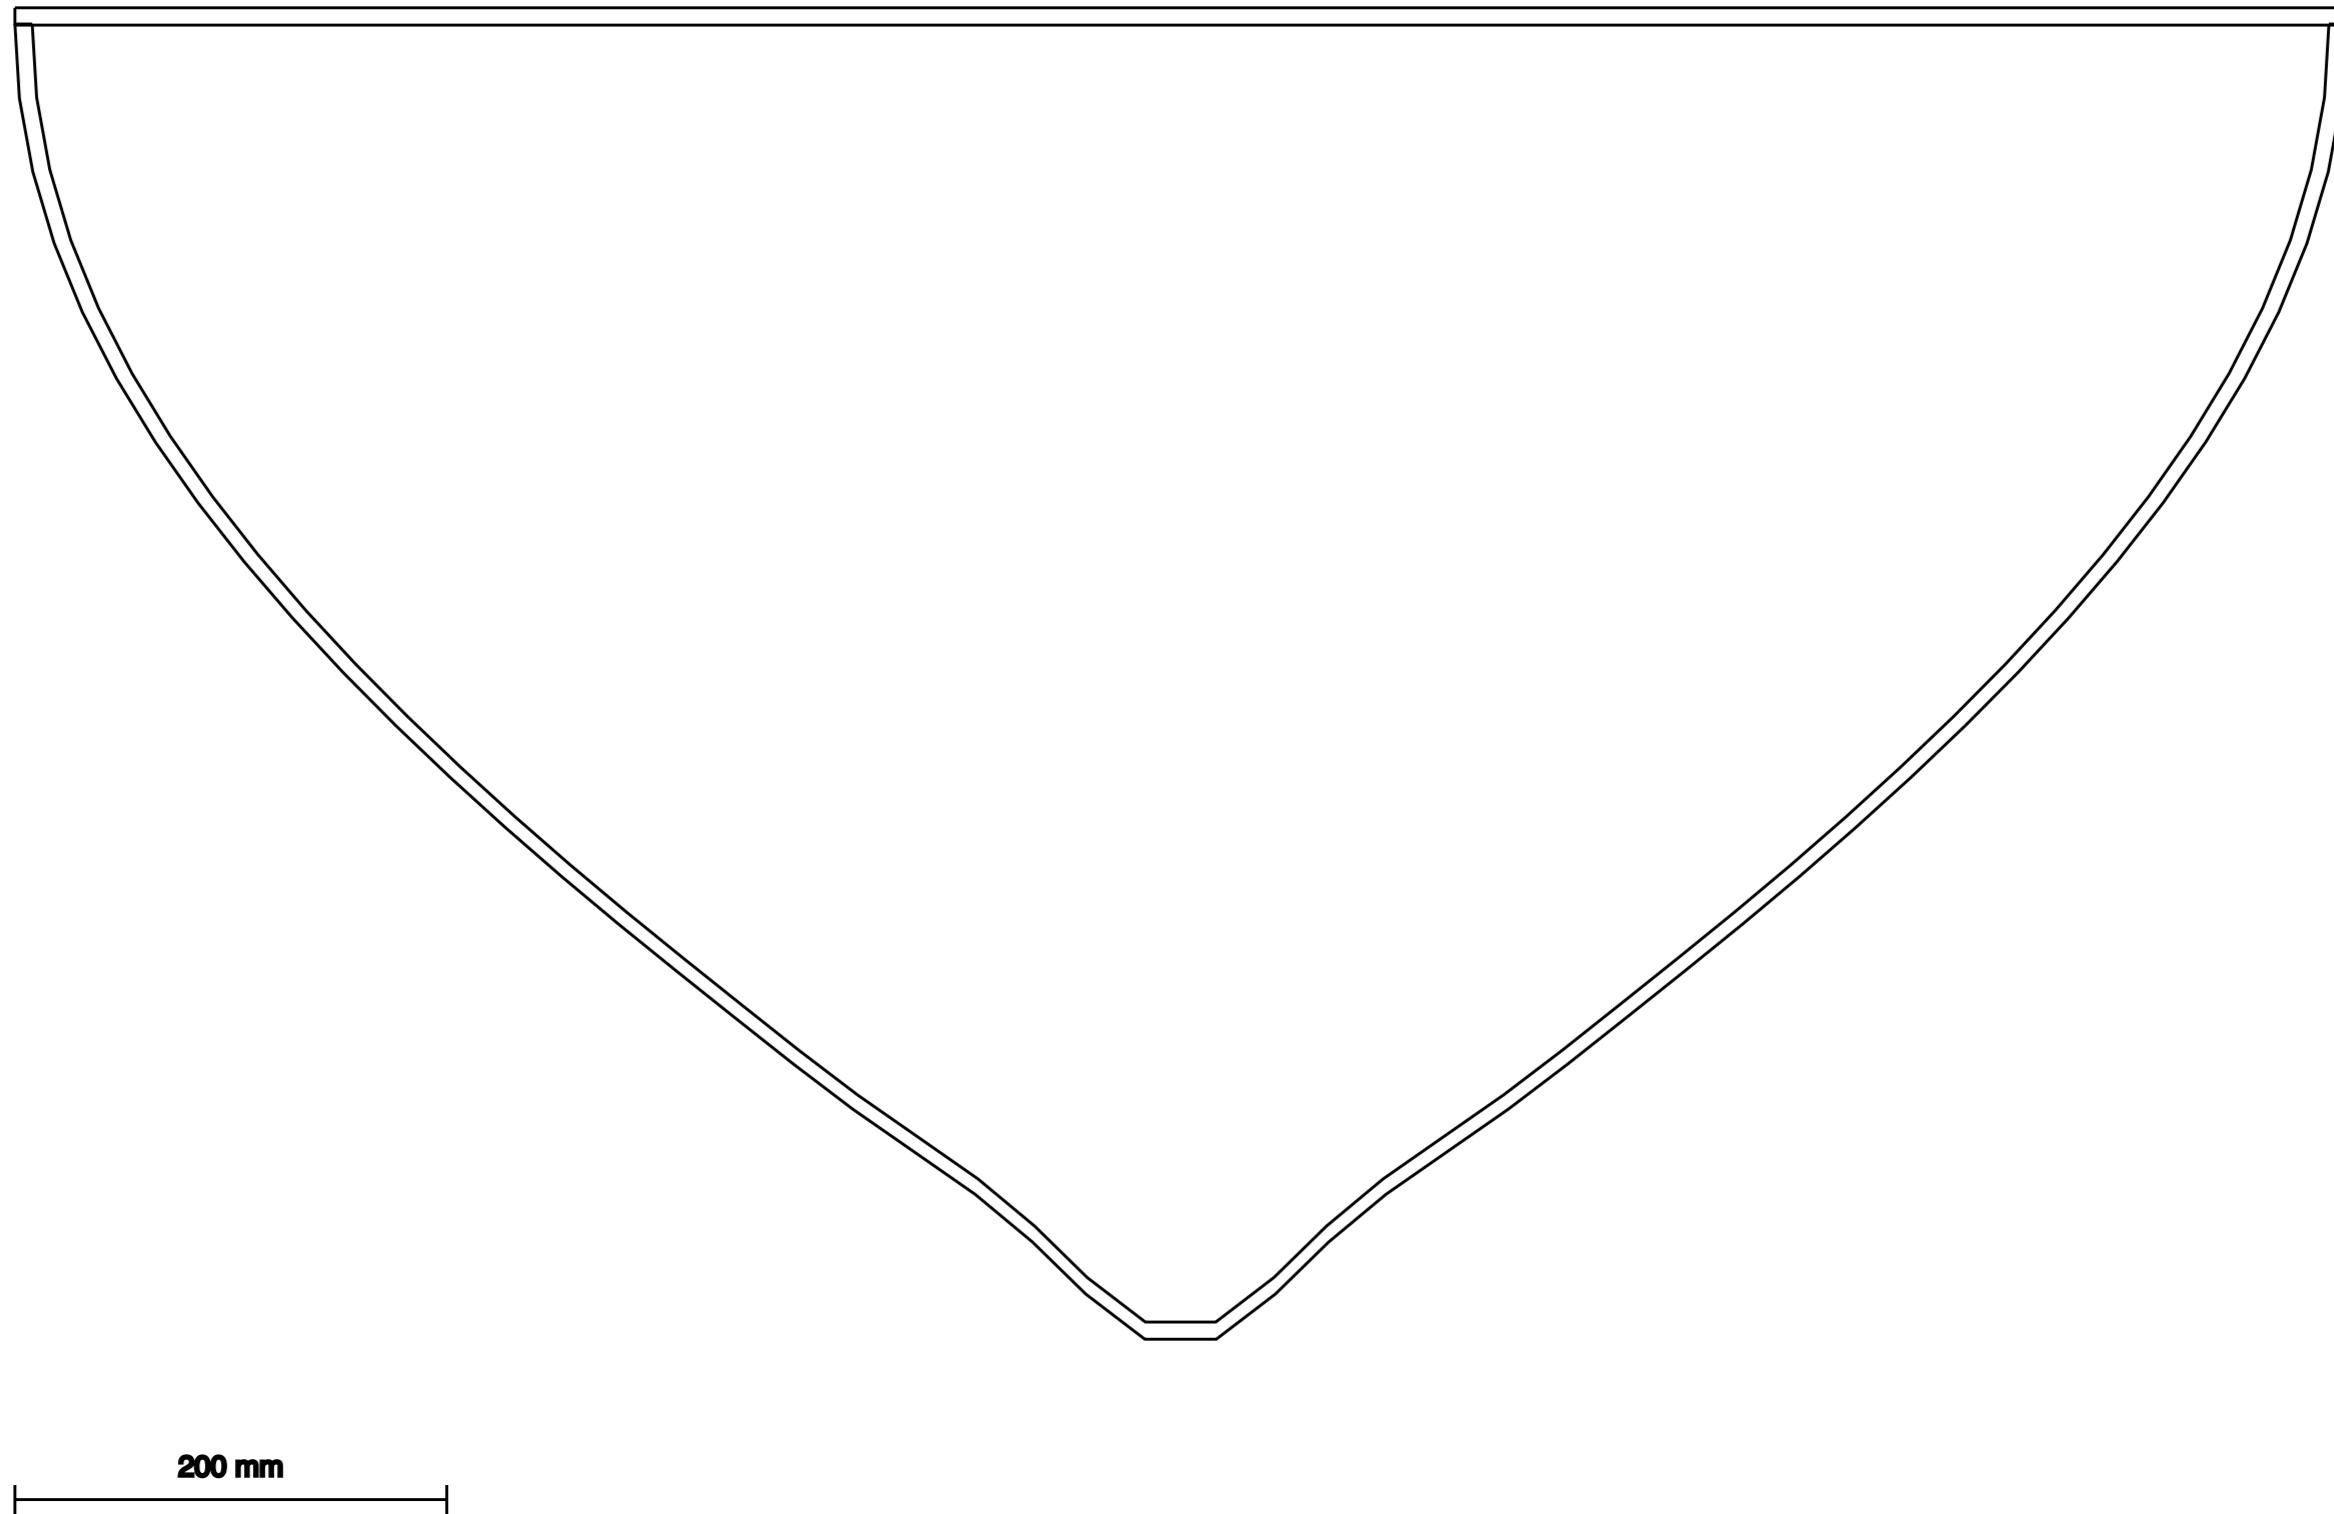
Body Plan—Section at stn_5 (Y=2033mm)
